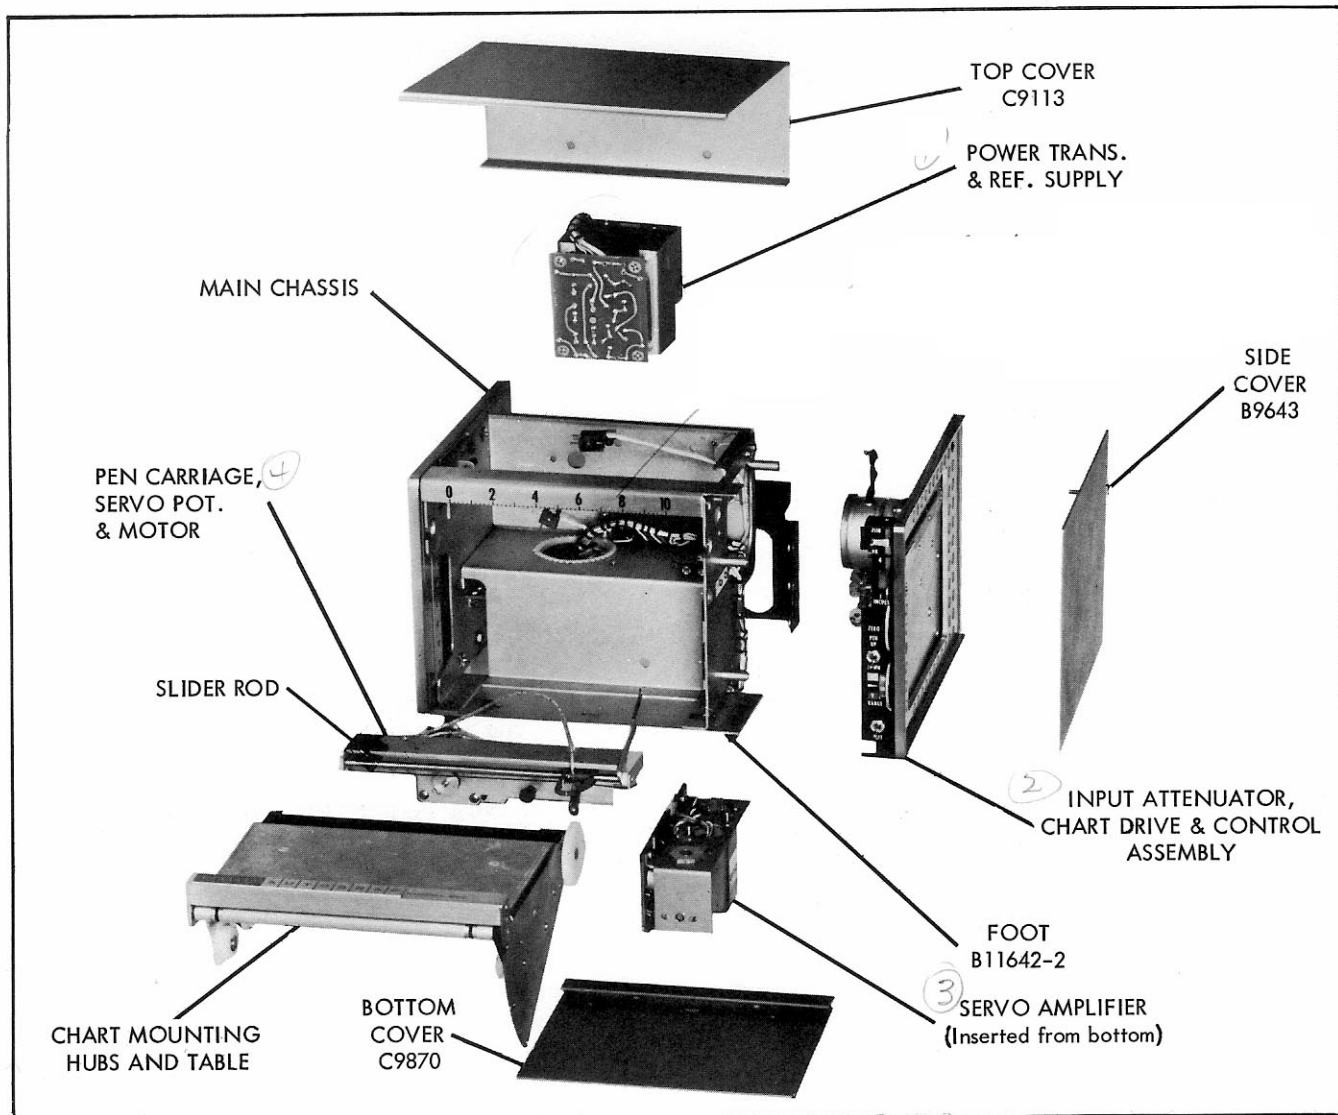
MAJOR ASSEMBLY DIVISIONS
